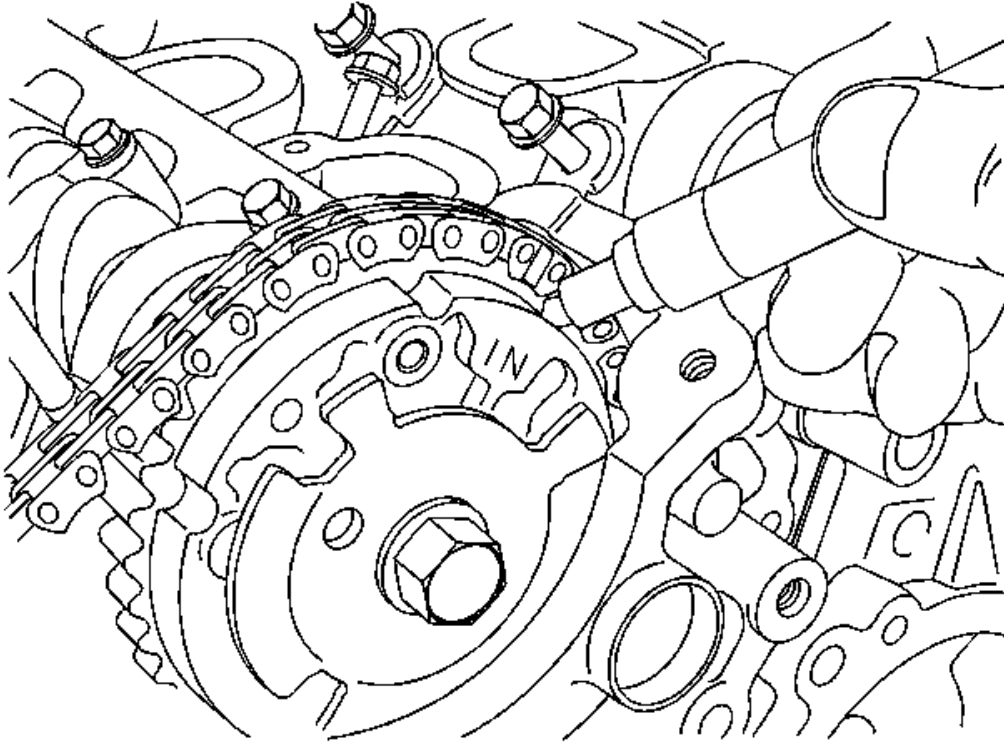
Marking Position Of Chain To Camshaft Position Actuator - Intake
